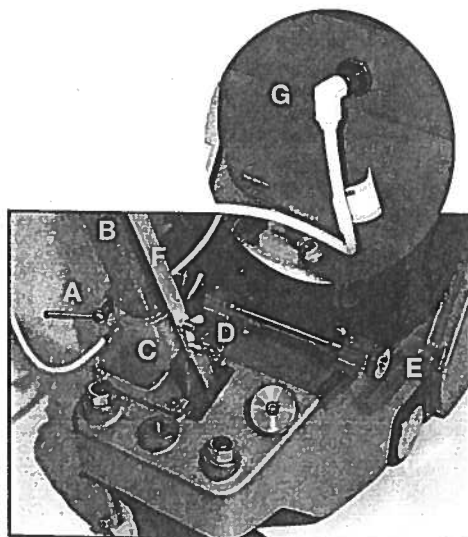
A. Lever #3.06 B. Dust pipe #41 C. Dust pipe support #3 D. Wing nuts E. Knurled nut for motor mount #82 F. control rod #42 G. Quick Disconnect #76.09
